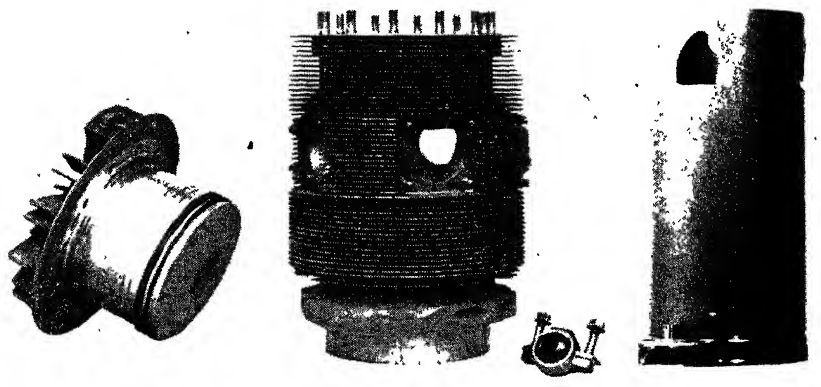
Bristol sleeve-valve engine cylinder head, cylinder, and sleeve. (*The Bristol Aeroplane Co., Ltd.*)
